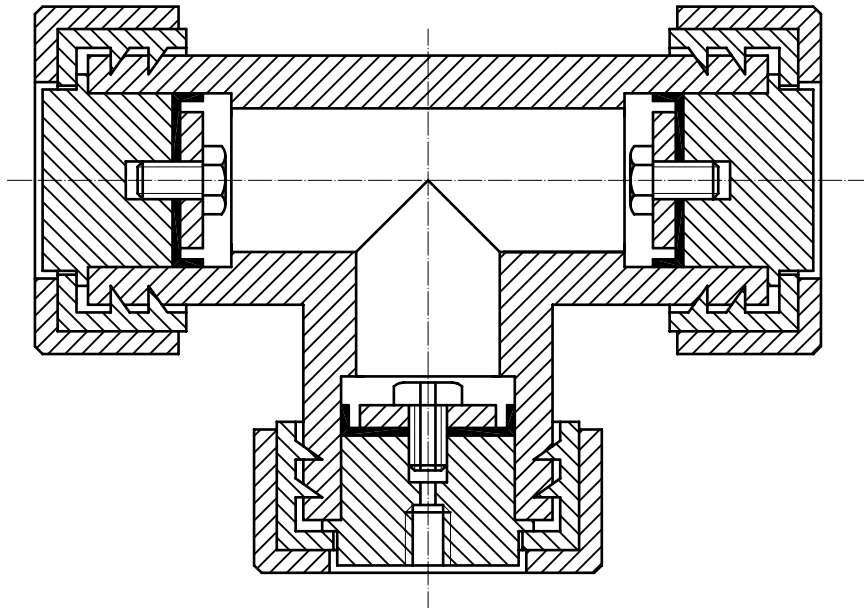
Example of a pressure-tight test piece assembly with mechanical compression joints and with hydrostatic end thrust
